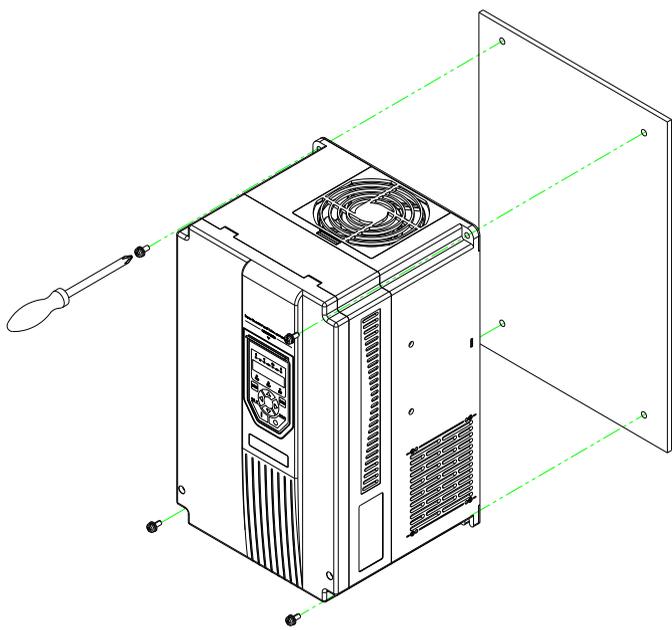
Wall-mounted Type Hope530G0.75T4~Hope530G37T4 Models
